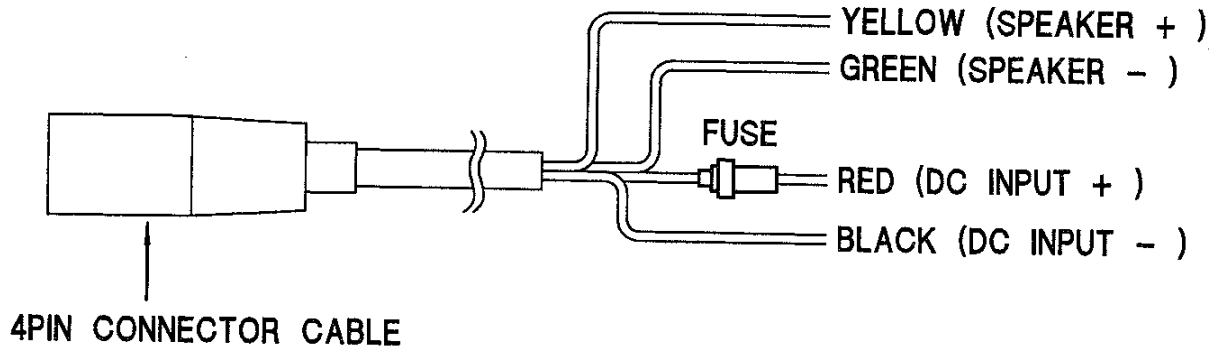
POWER / EXTERNAL SPEAKER CABLE AND 4PIN CONNECTOR CABLE
